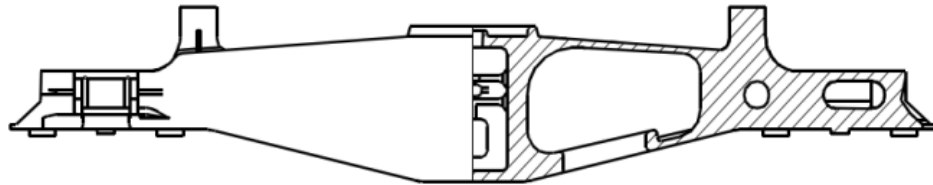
Section of a bolster with a flat center plate [2, p. 61]
